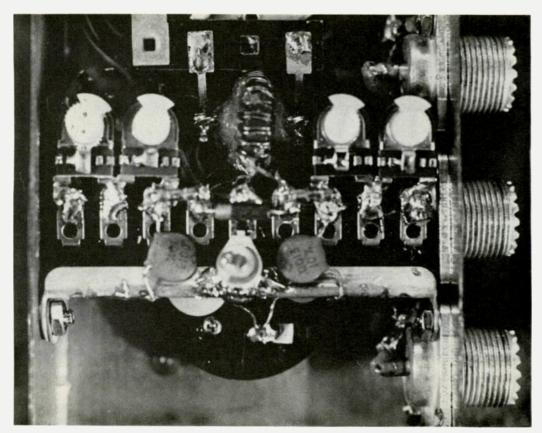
Photo C. A closeup view of nine-lug terminal strip and current transformer. The input SO-239 connector is on the lower right.
